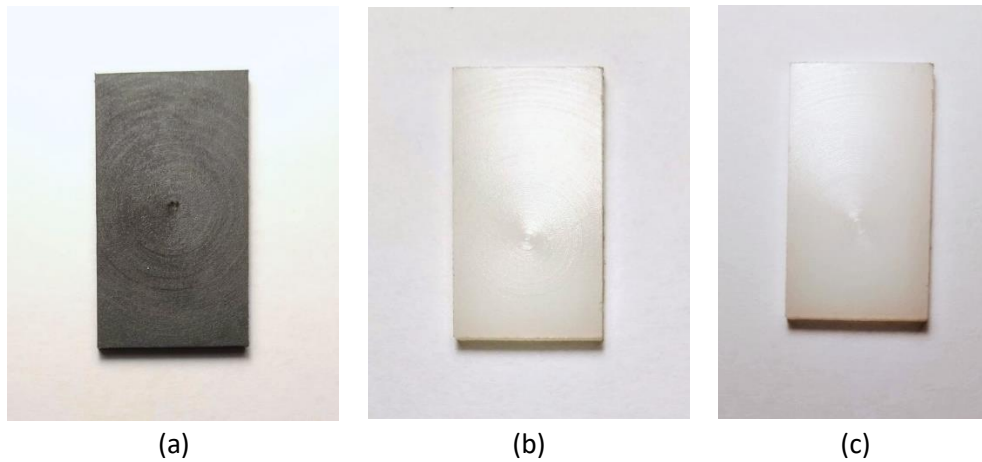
Photographs of the specimen of (a) PA66 GF30, (b) PA66N and (c) PA6N in their final dimensions.
